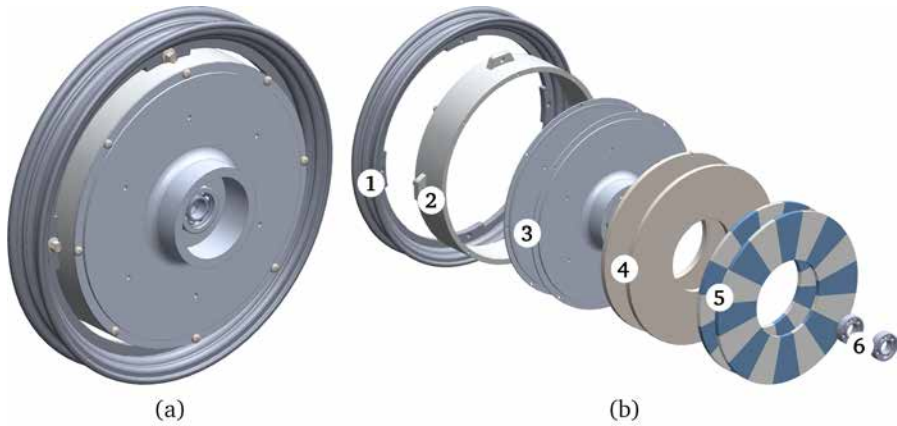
The rotor assembly of SAT PMBLDC in-wheel motor. (a) Complete rotor assembly. (b) Exploded view (1. Wheel rim, 2. spacer, 3. end covers, 4. rotor yokes, 5. rotor poles, and 6. bearings.).
